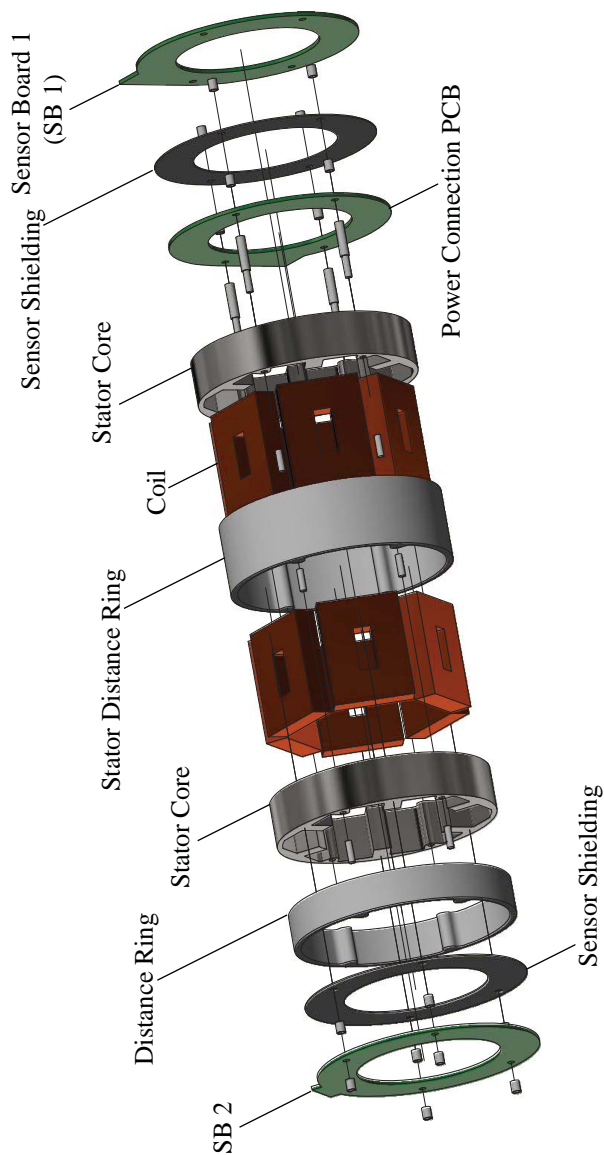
Exploded view of the outer rotary stator assembly with sensor PCBs and the power connection PCB.
